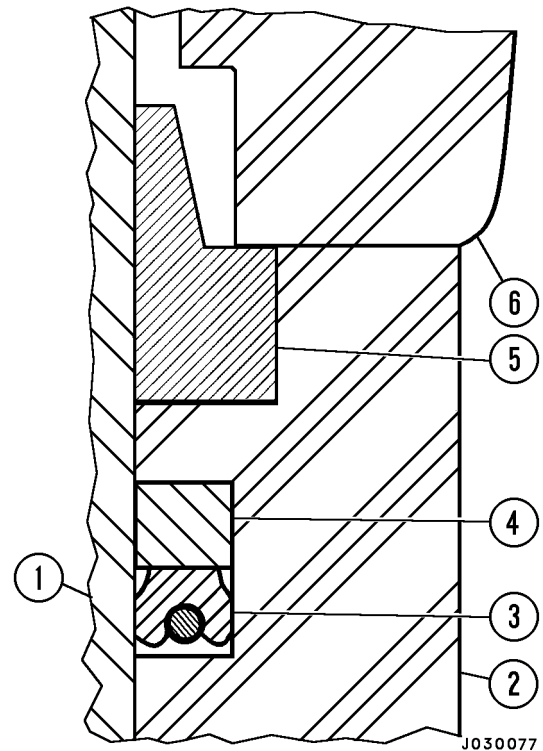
VALVE BODY SEAL INSTALLATION
